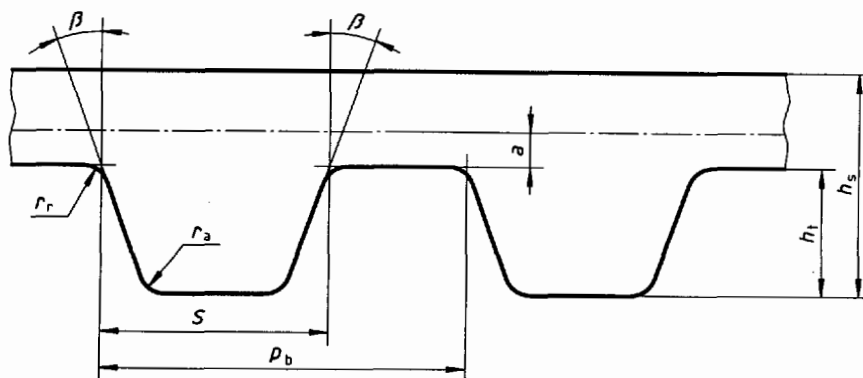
Nominal tooth dimensions (profile) for types ZA and ZB
